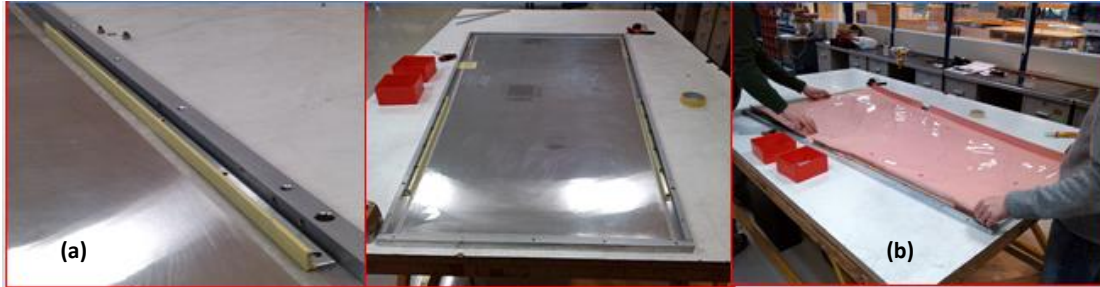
Mechanics preparation for chamber assembly – fixing insulated holding bars into place (a) and laying Copper sheet onto the frame (b).
